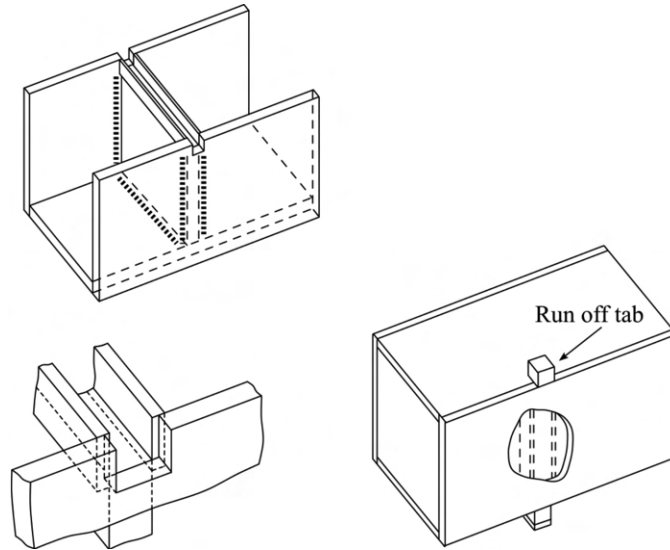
First application of ESW for interior diaphragms of box columns (adapted from Japan Welding Engineering Society, 2004).
